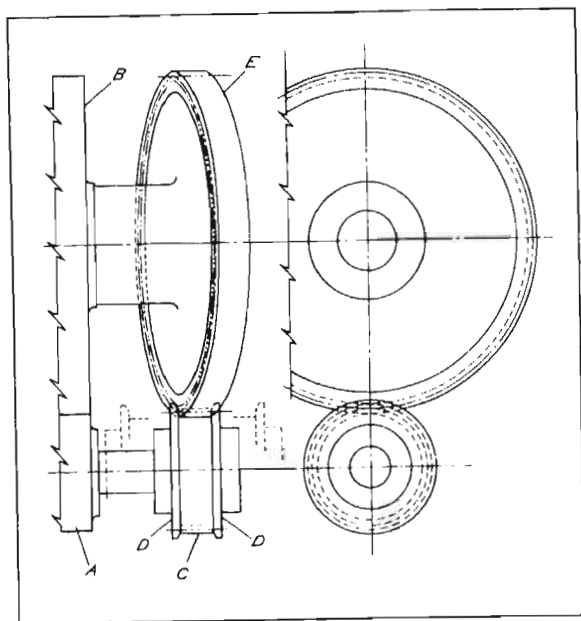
Shrouds *D* constrain gear *C* to the helicoidal path of gear *E*, causing roll *A* to vibrate axially as well as rotate.
